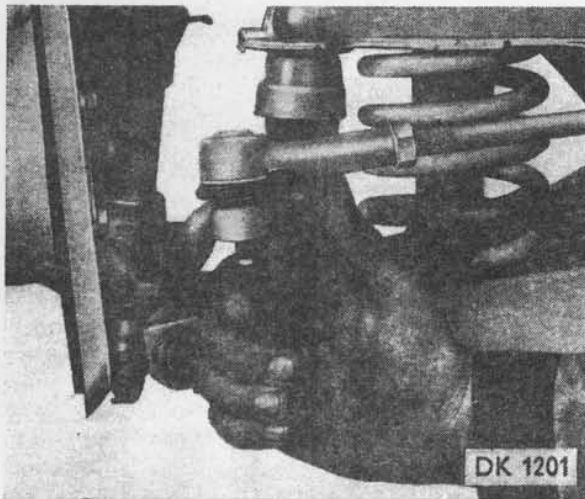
/5 - Pressing Out Pins of Steering Ball Joints Using MP 6-138 Drag
